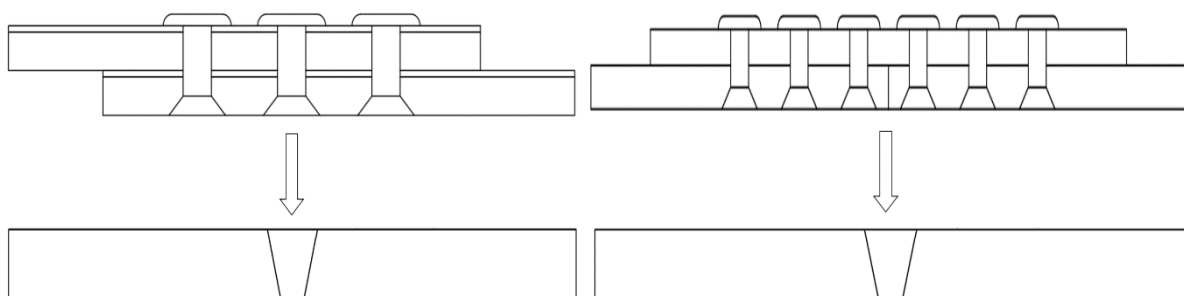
Weight and Complexity Trade-off between Current Riveting Techniques and Friction Stir Welding
